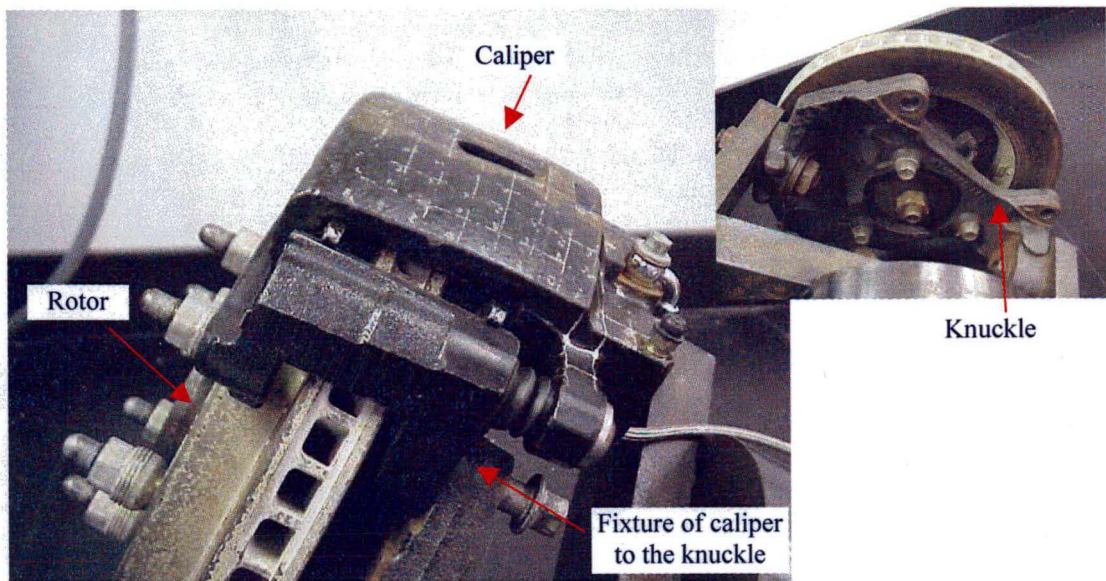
Brake components. Main picture shows the rotor and caliper (with pads inside). The knuckle can be seen in the detail.
